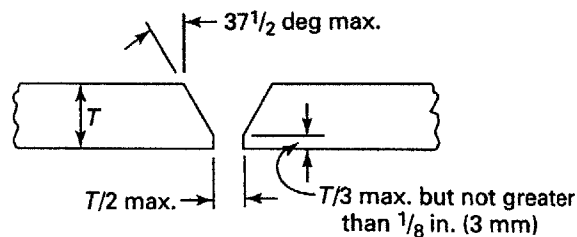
Test Coupon Alternative Butt Joint Dimensions [ASME, 2007]
